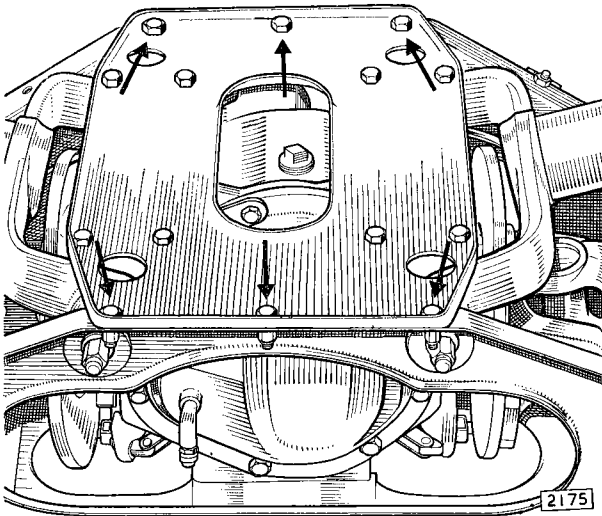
Showing the six bolts which secure the tie plate to the cross beam
